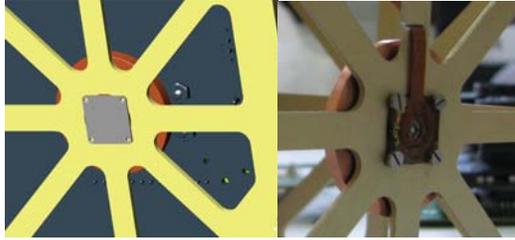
Reaction wheels mounted on the mechanical structure. CAD model (left) and real model (right)
